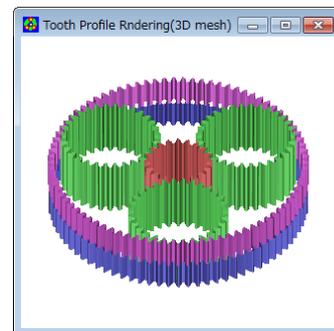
Teeth rendering (Spur gear, Gear ratio=93.8)
